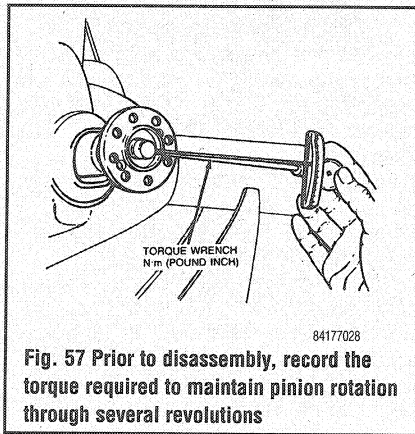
Prior to disassembly, record the torque required to maintain pinion rotation through several revolutions
